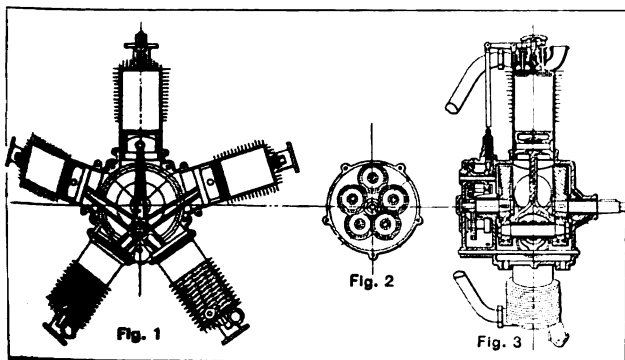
Sectional view of the Anzani five-cylinder, four-cycle motor
